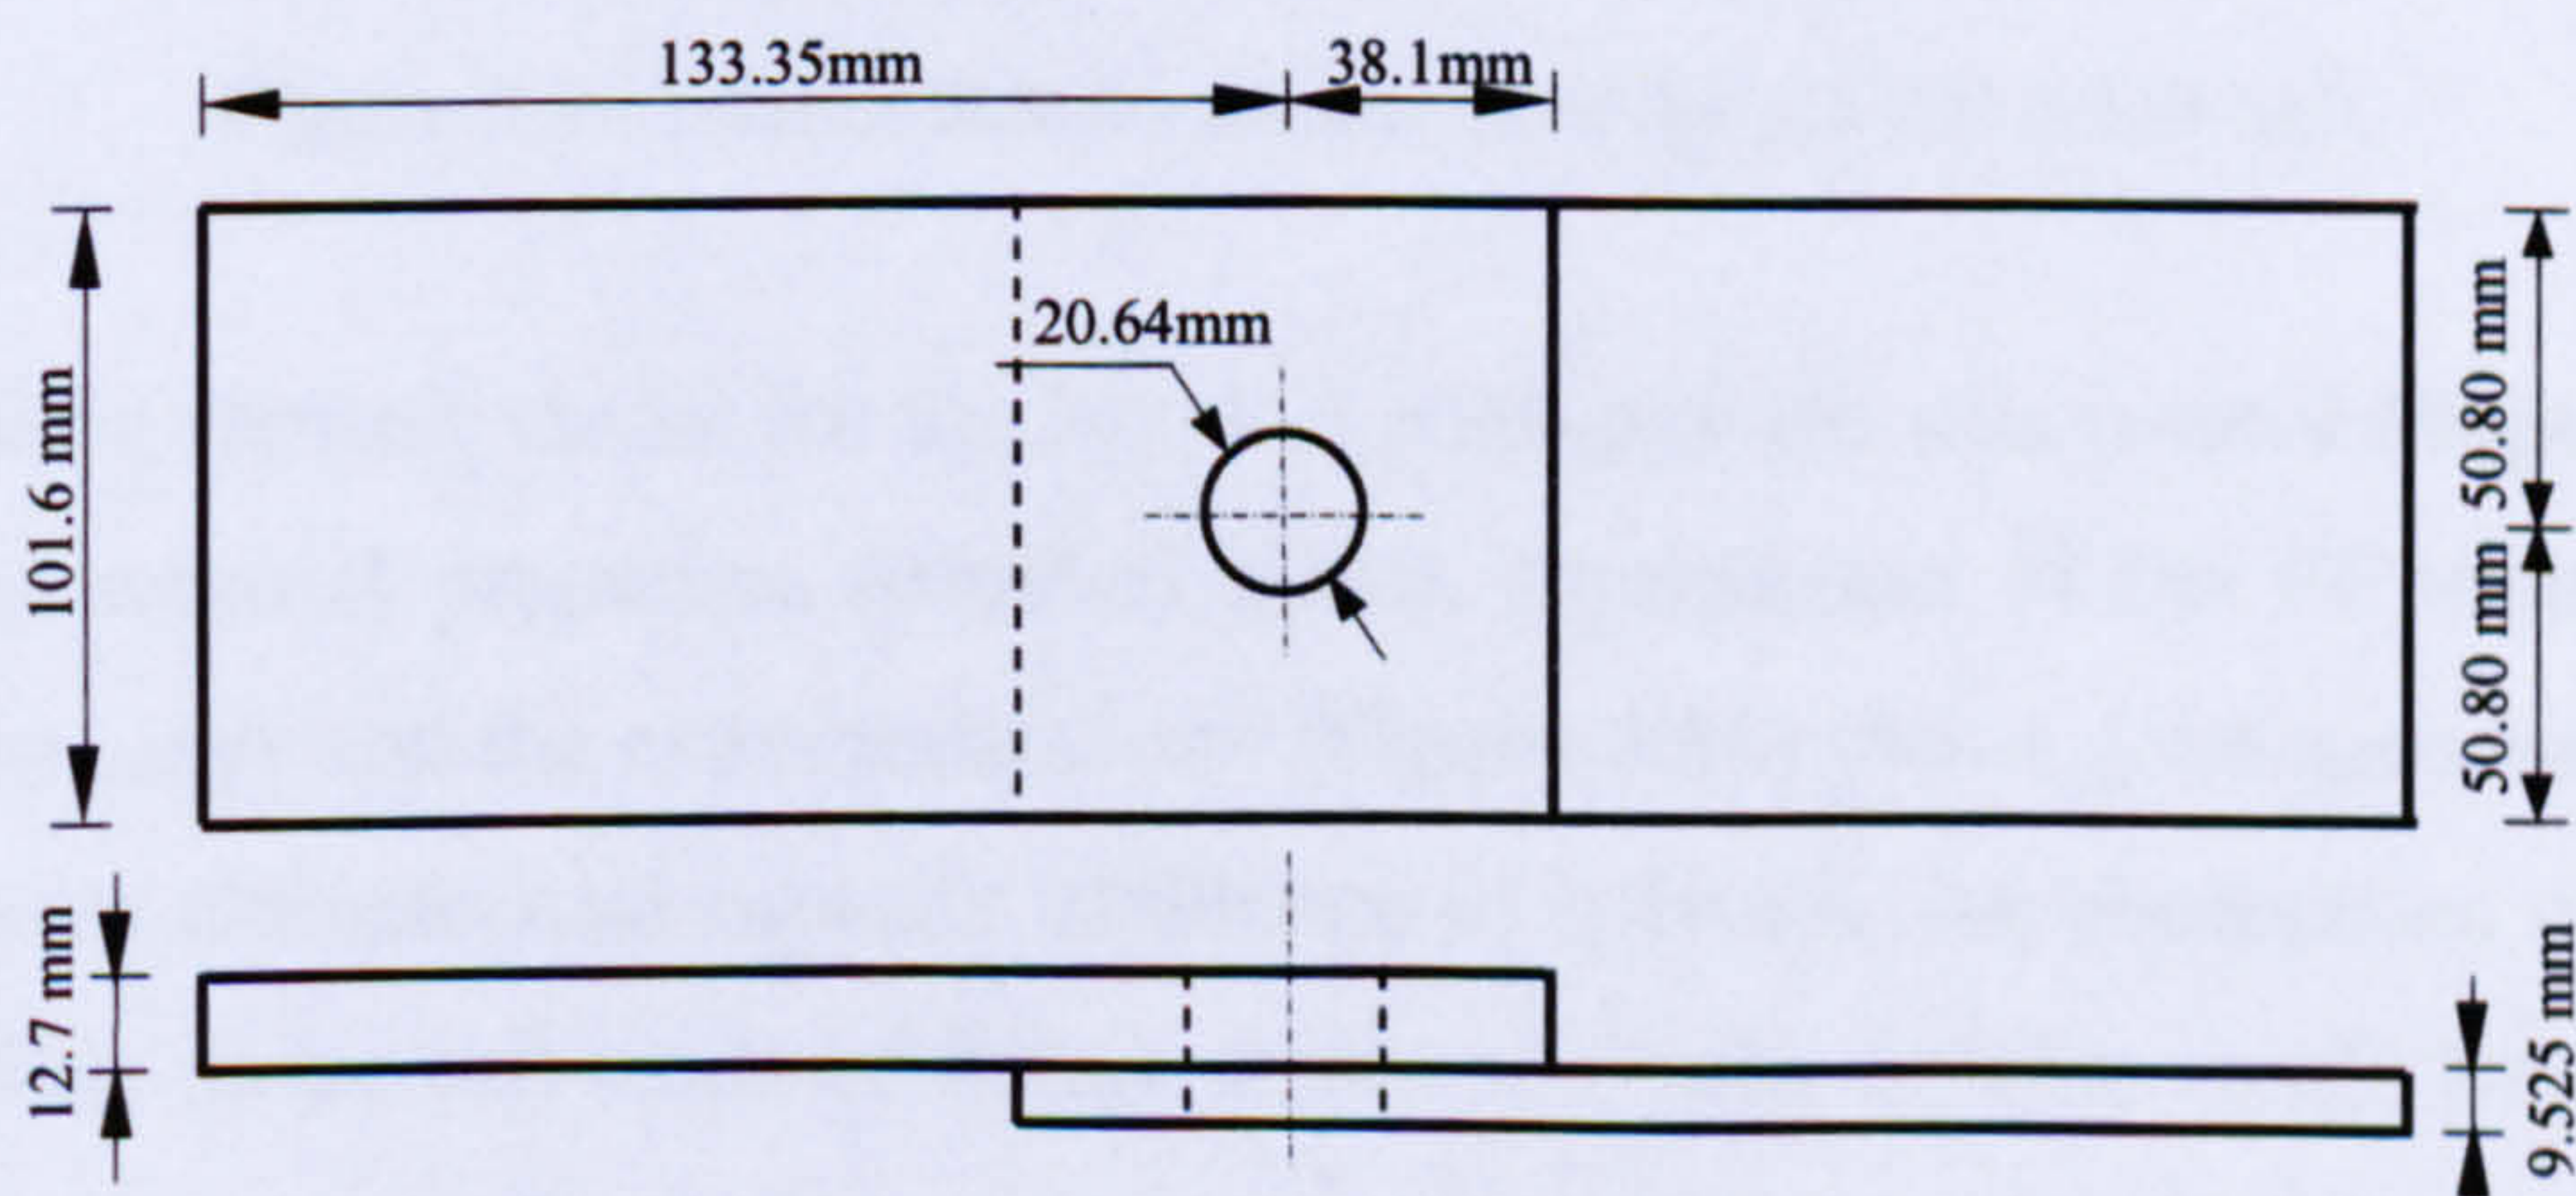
Geometrical details of Steel lap joint for test specimen
